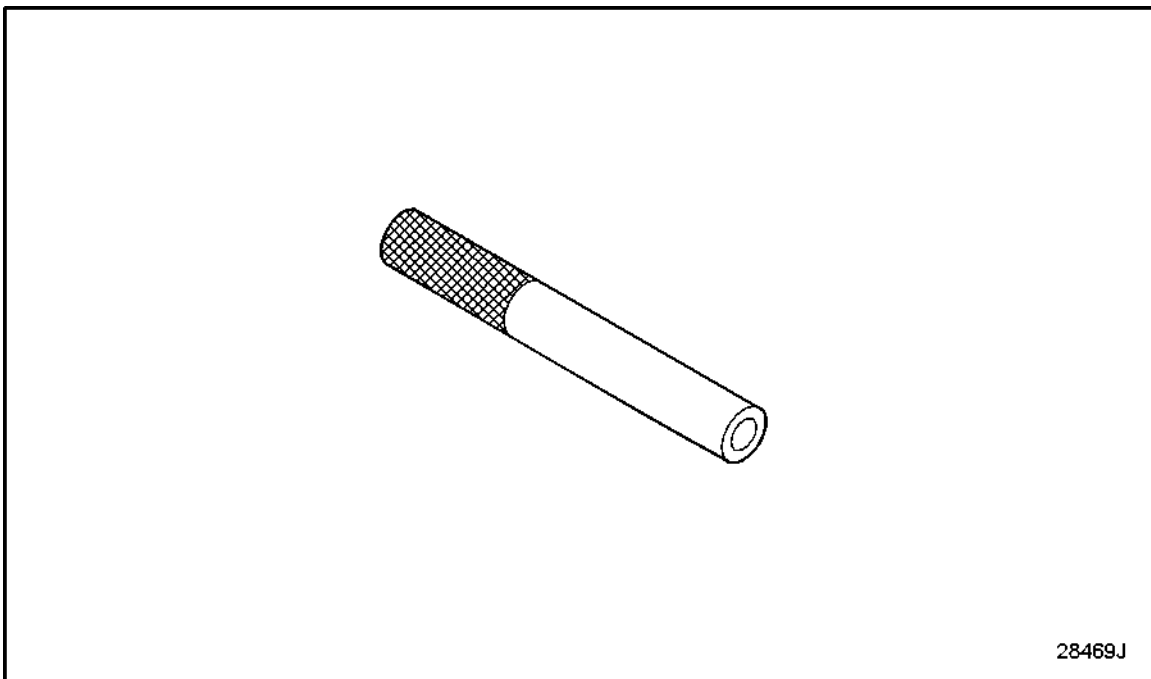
Valve Bridge Guide Installer,J 22487
